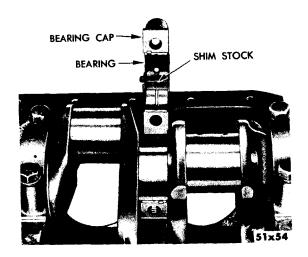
Checking Main Bearing Clearance with Shim Stock
